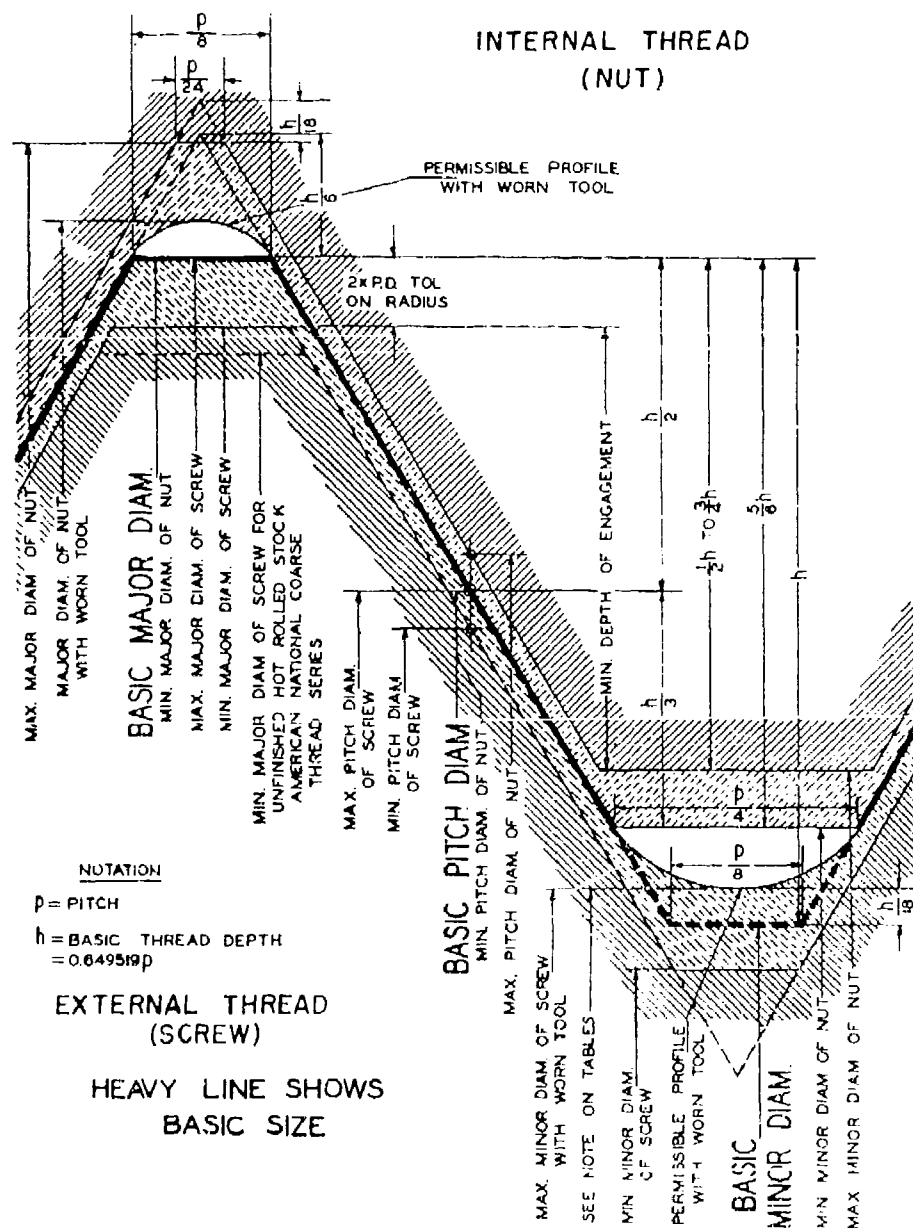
Disposition of tolerances and crest clearances for class 2.
